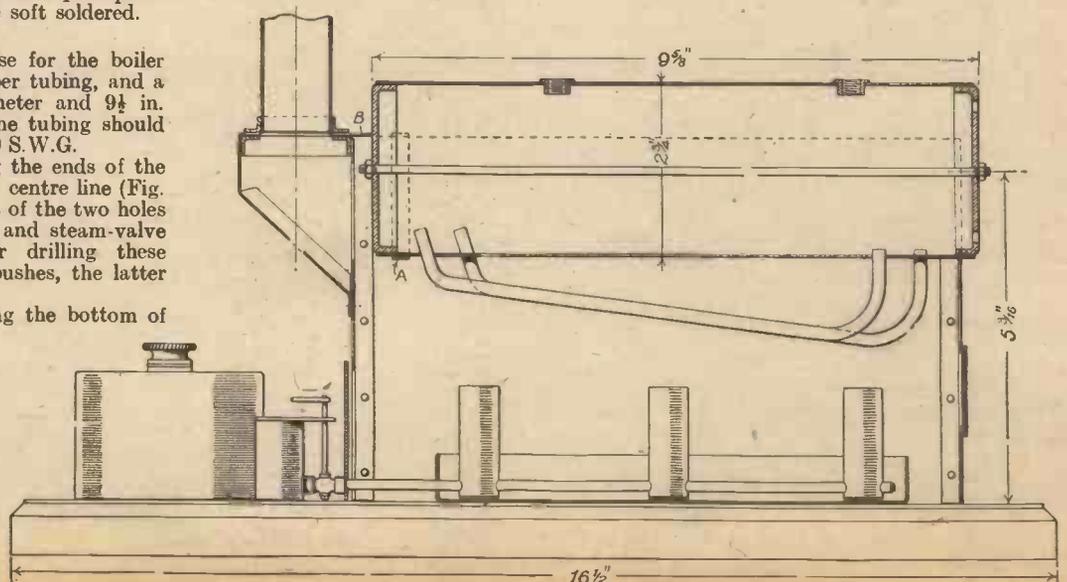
Sectional elevation of the boiler, showing spirit burner in position.
